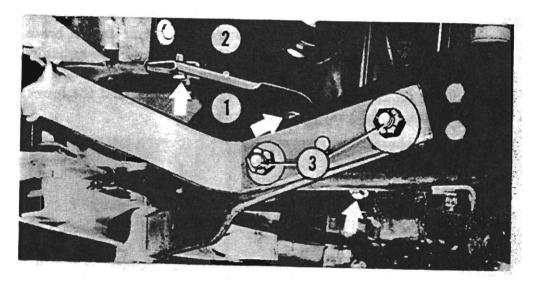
Take Out the Lower Splasher to Side Splasher Screws and the Bumper Bracket to Frame Bolts.
